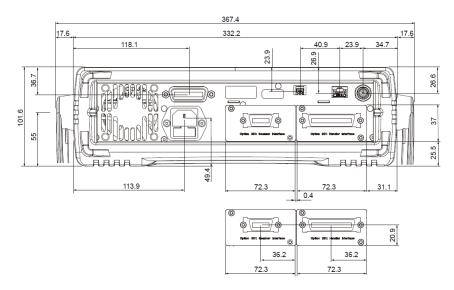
Dimensions (rear view, with handle and bumper, in millimeters, nominal)
